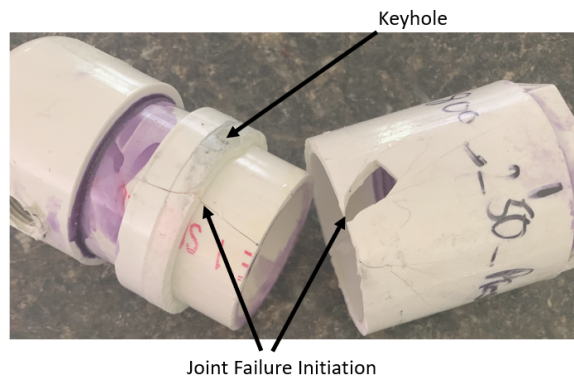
Fractured C3 pipe weld after a burst pressure of 8.44 MPa (1225 psi).
